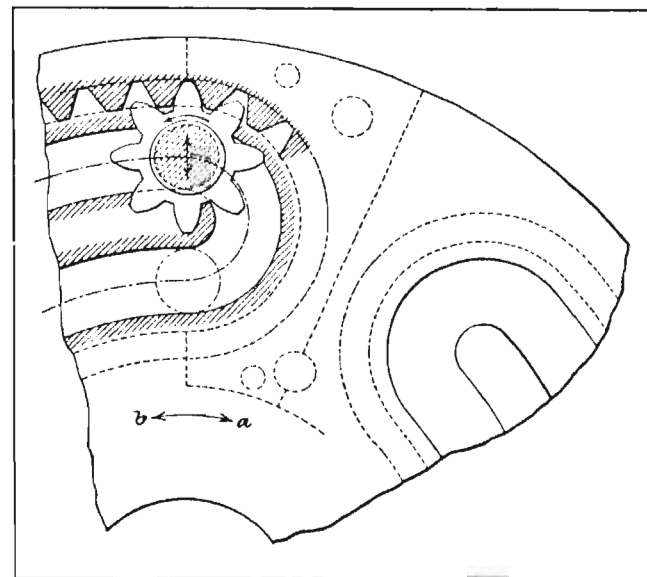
Shaft-reversing Mechanism that Gives Higher Velocity in One Direction
